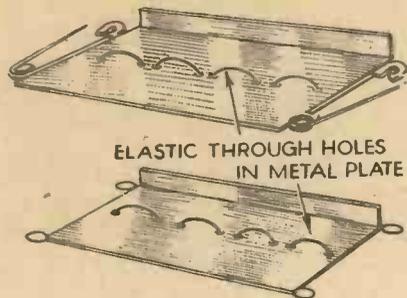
Details of the thimble holder shown in Fig. 9.
